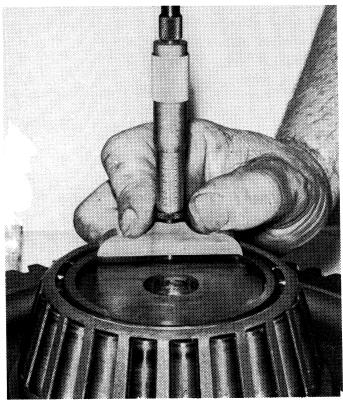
Measuring Distance from Front of Front Roller Bearing Inner Race to Front of Reverse Shaft.
